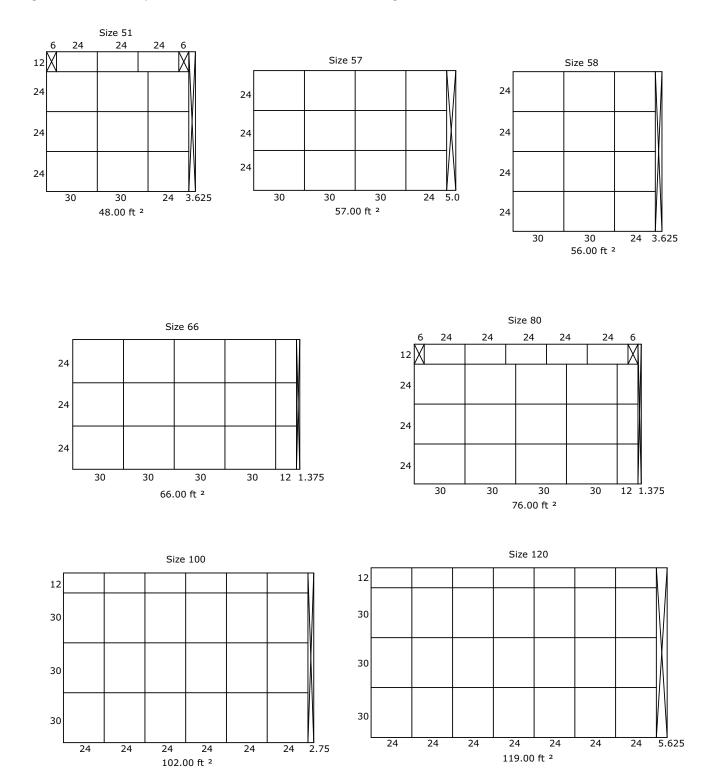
HEPA filter placement for unit size 57-120 - front loading
